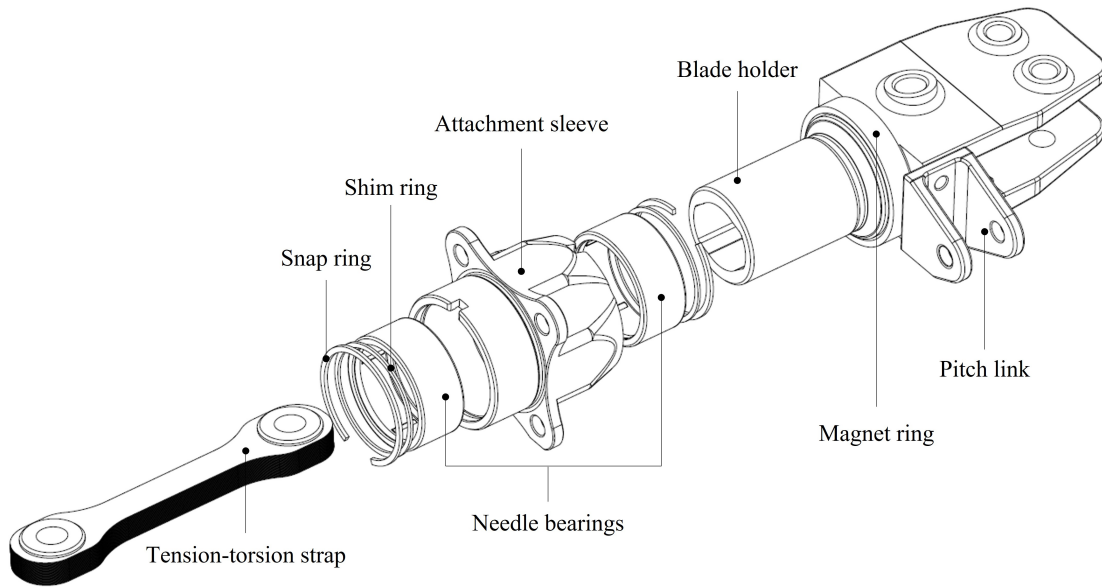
Assembly view of the hingeless MERIT blade attachment
